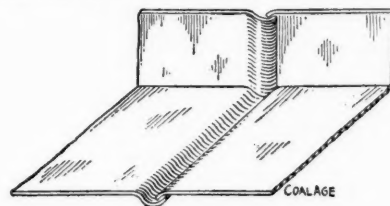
TROUGH JOINTS OF RITCHIE CONVEYOR
